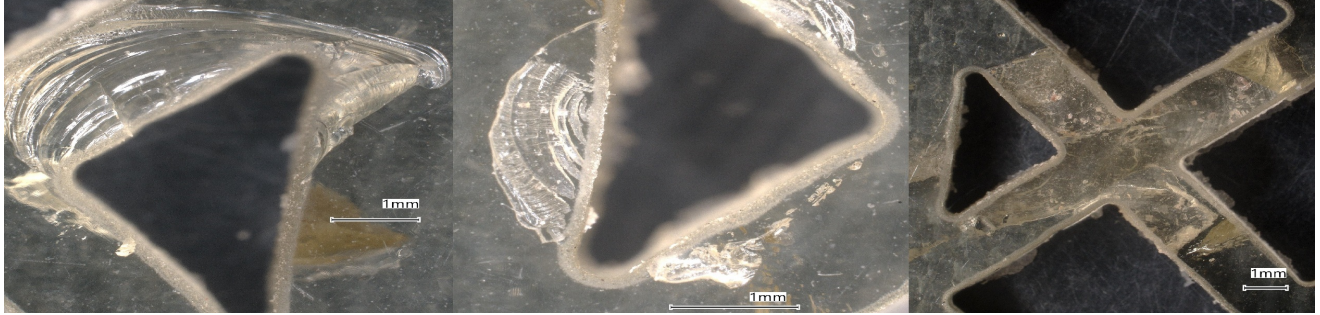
Manufacturing defects in the Meta1 specimen induced by waterjet cutting.
